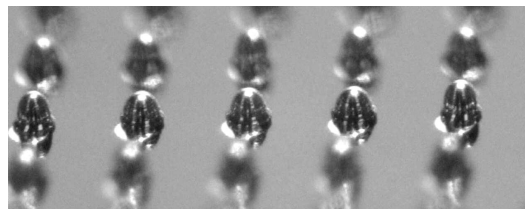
100 μm solder bumps ink-jet printed on to 100 μm pads on 250 μm centres at a rate of 400 per second [39]
